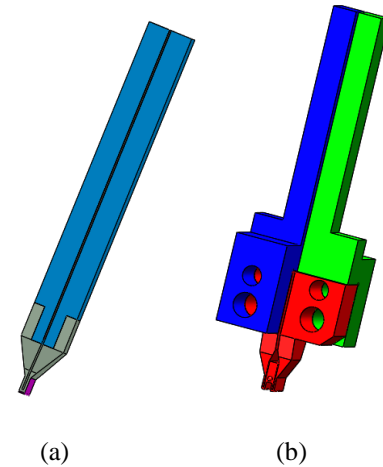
The hot bar reflow (a) single head and (b) dual head
